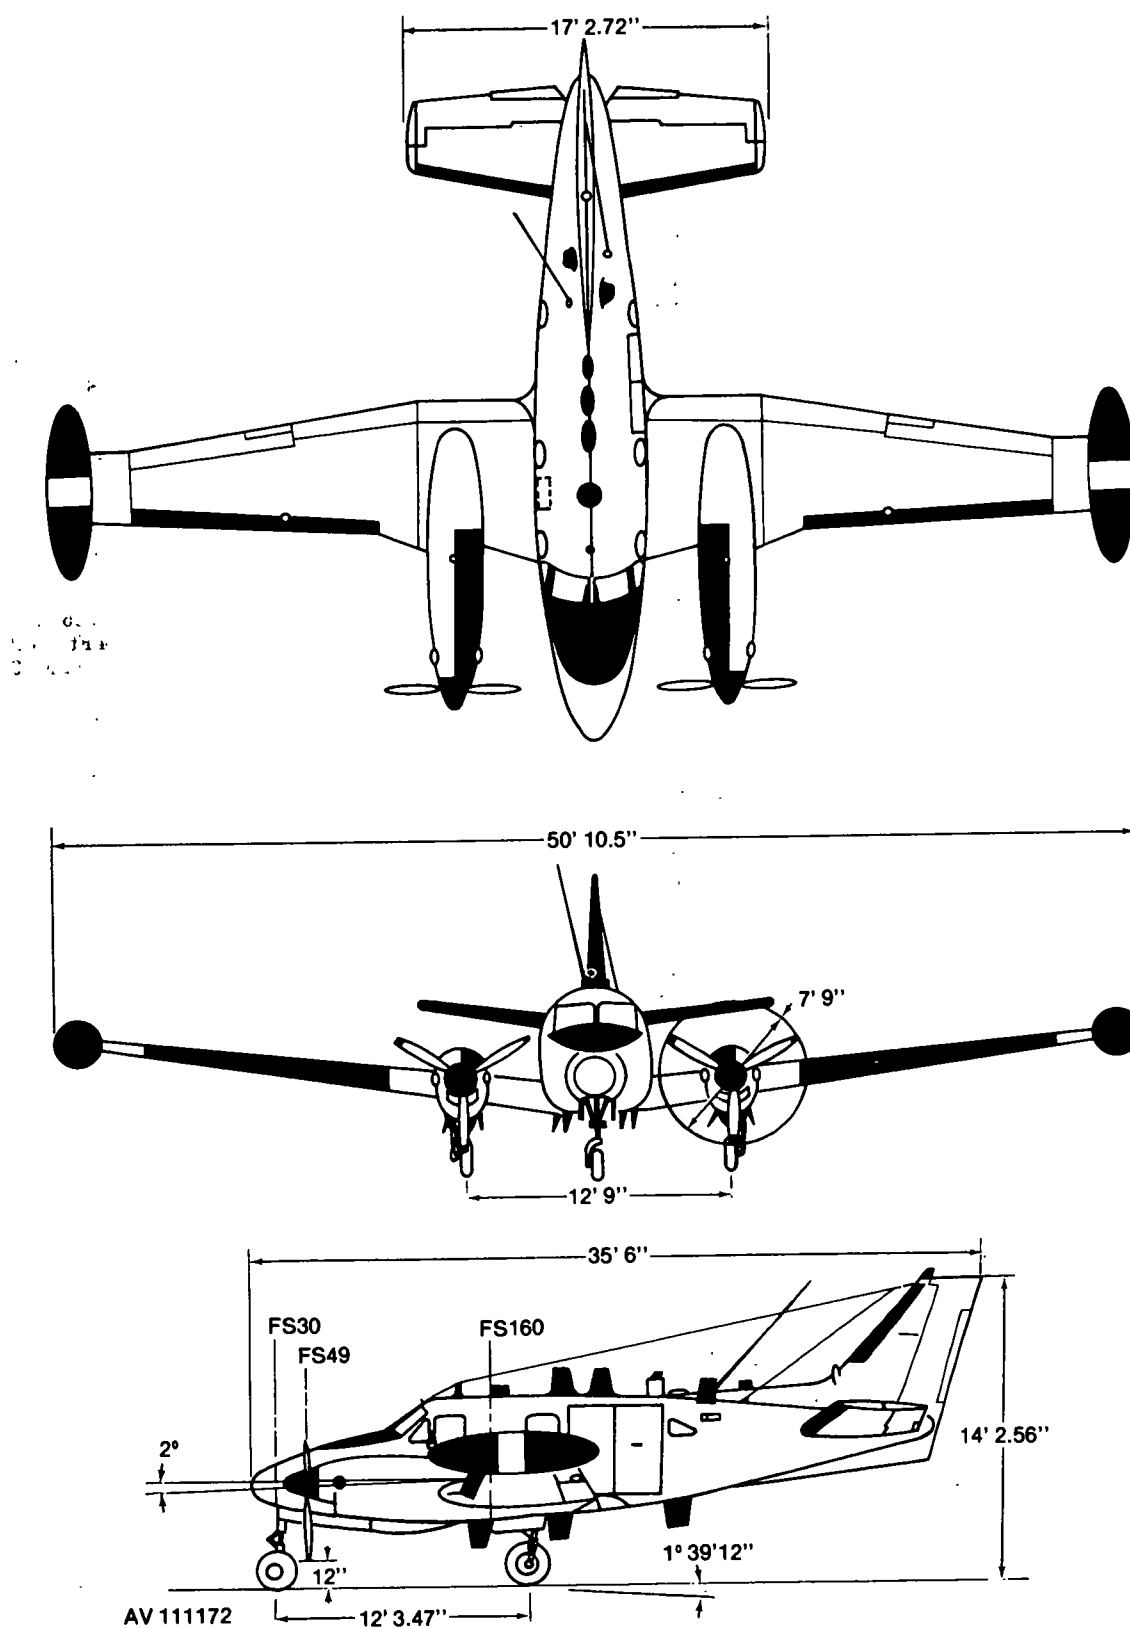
Three View Drawing and Dimensions (RU-21A)
